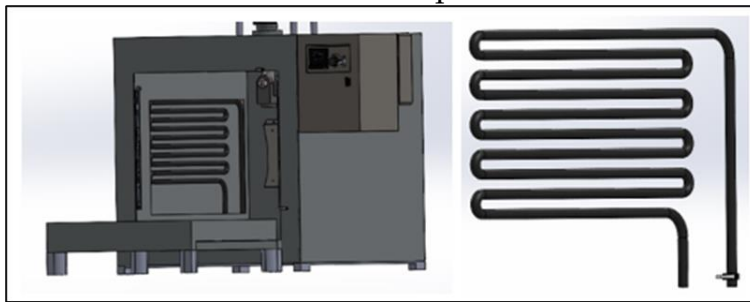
Arrangement of the Heating Element Unit Installed in the Machine
